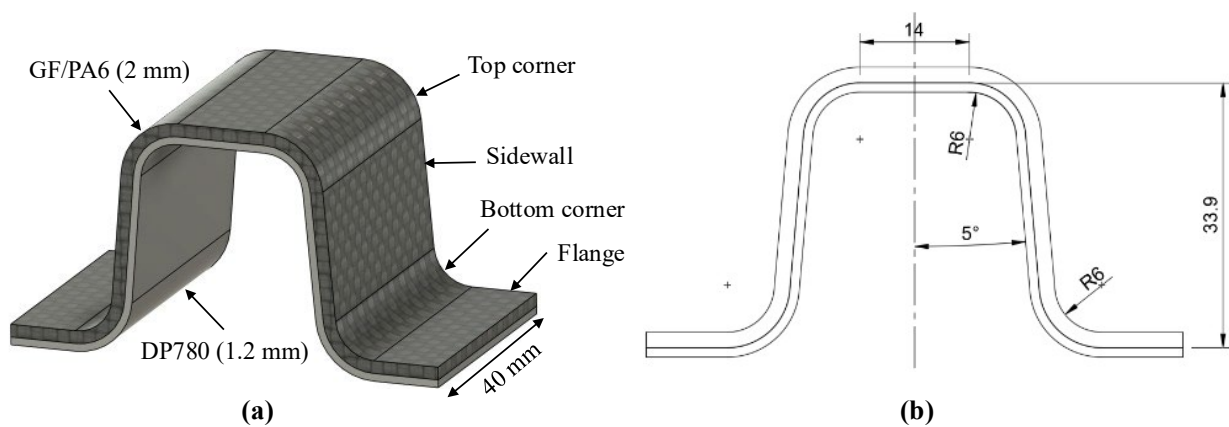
(a) Design and (b) the major dimensions (in mm) of the U-shaped demonstrator component.
